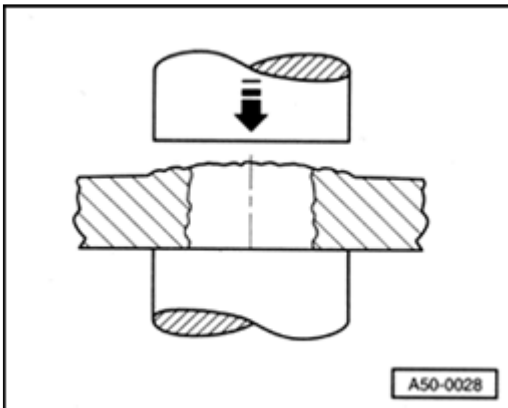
Reshaping Flange On Undamaged Panel With Rivet Tool
